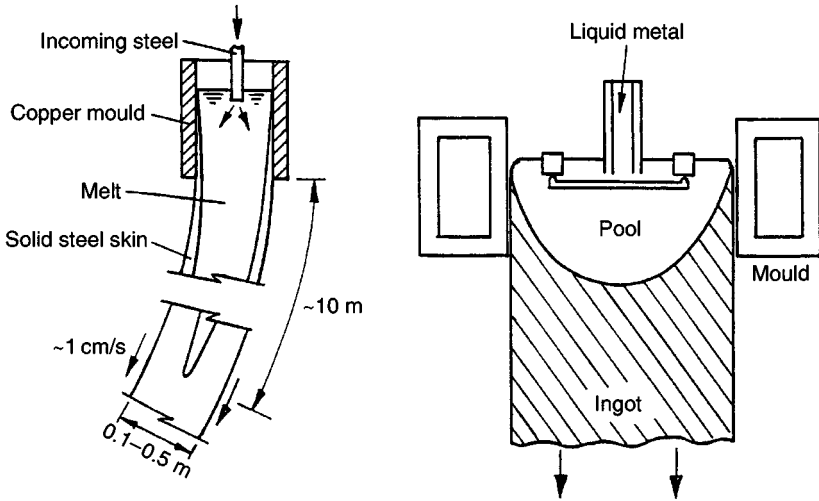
(a) Casting of steel; (b) casting of aluminium.
